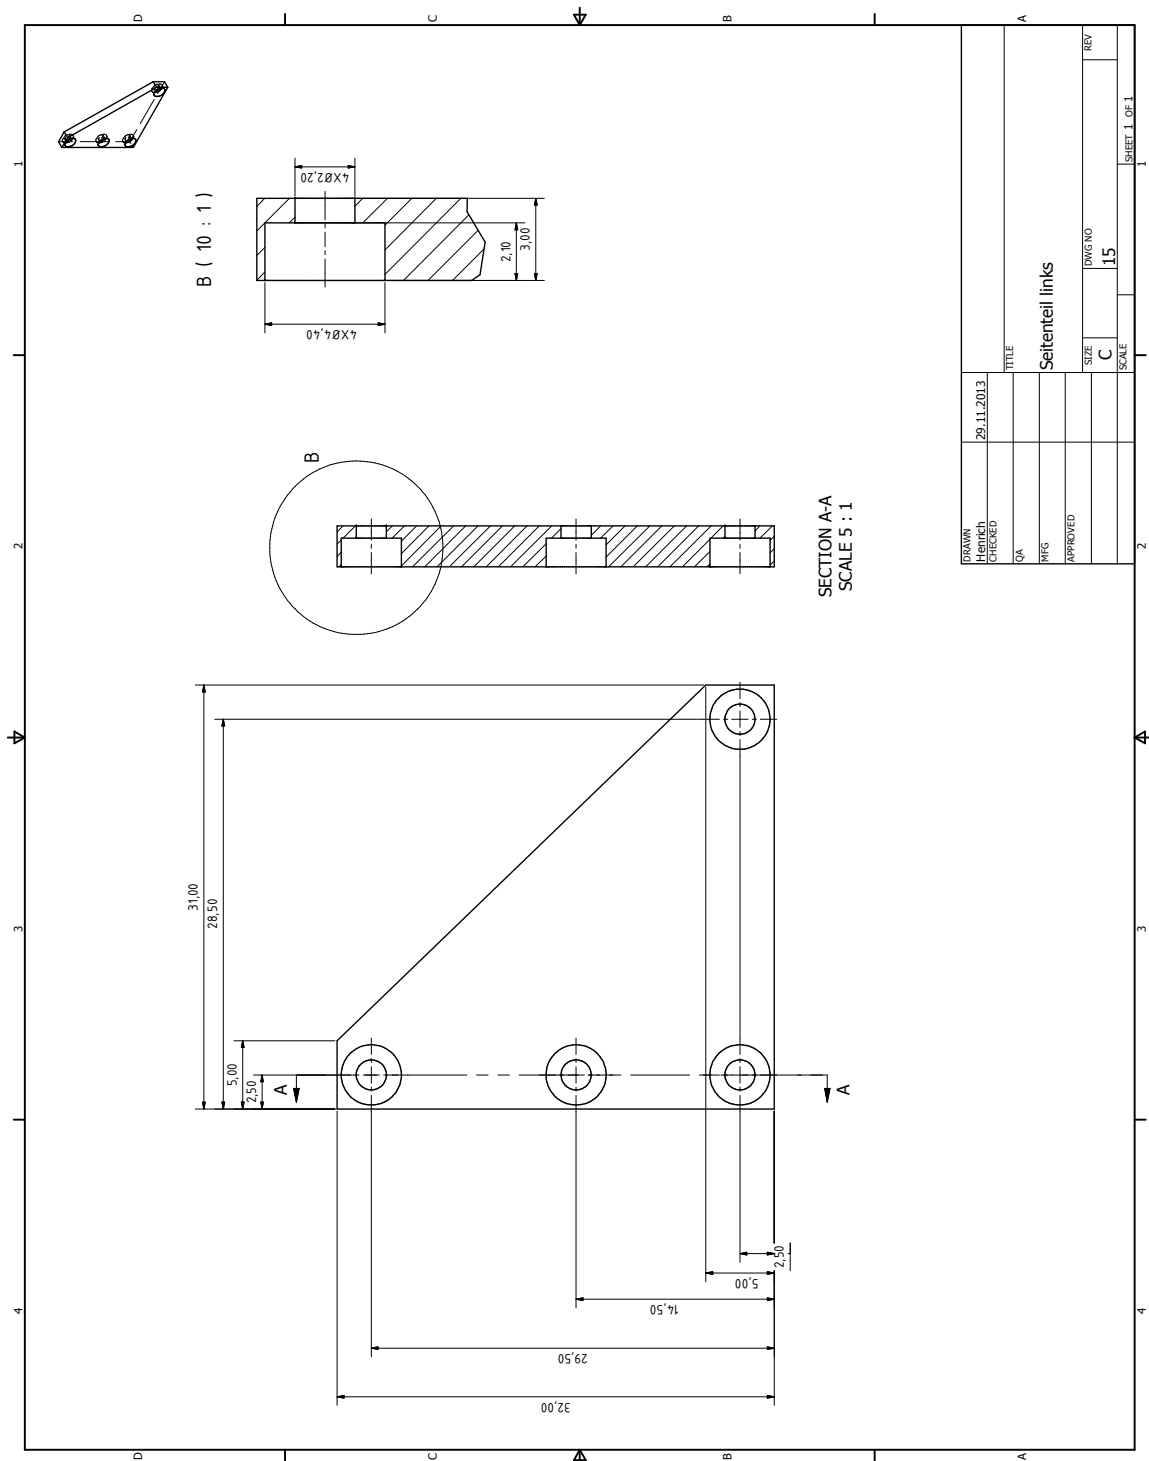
Technical drawing of the left side plate of the glass slide extension.
